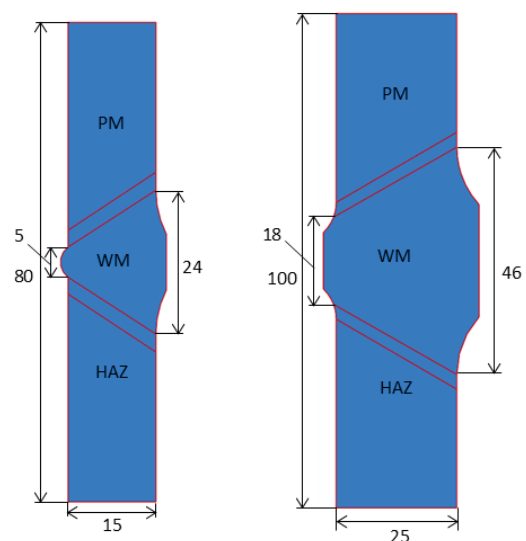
A dimensioned schematic image of the 15 mm and 25 mm WT girth weld models (All dimensions in mm).
